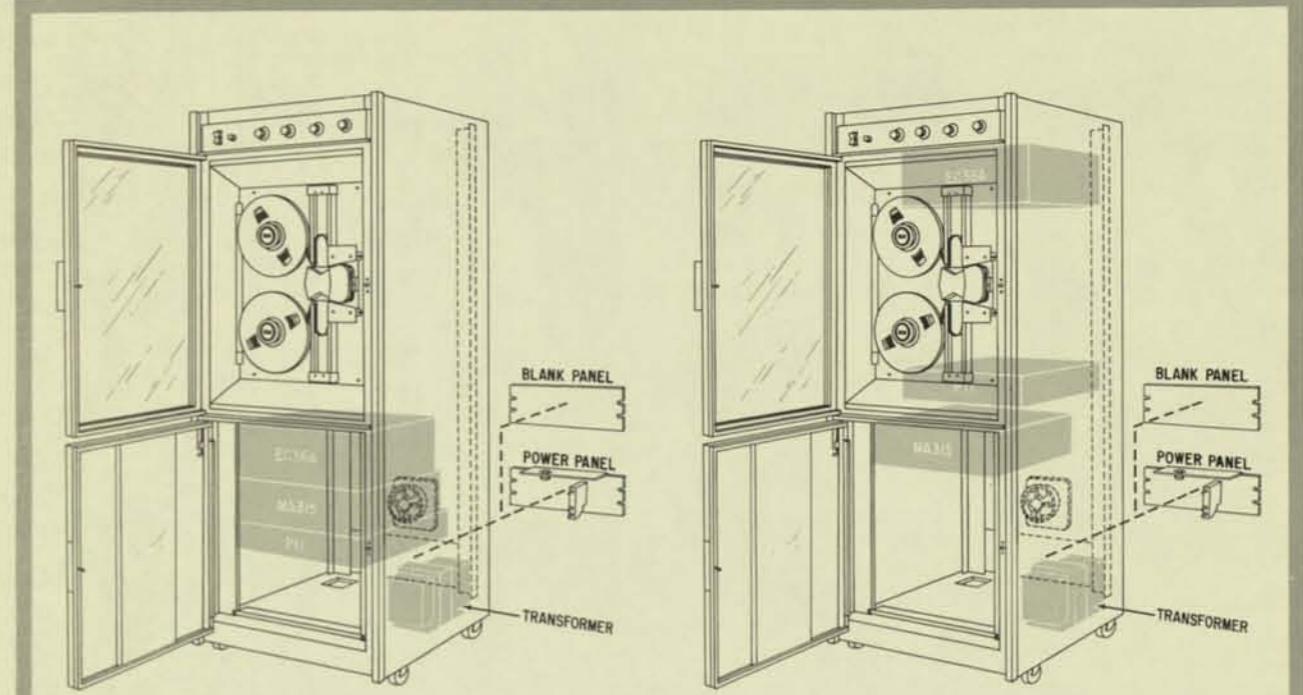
Alternate locations for drive electronics, amplifier, and amplifier power supply. The drawing on the left is the standard configuration. Rear mounted locations, shown on the right, are recommended when additional space is required for customer electronics and/or storage.
